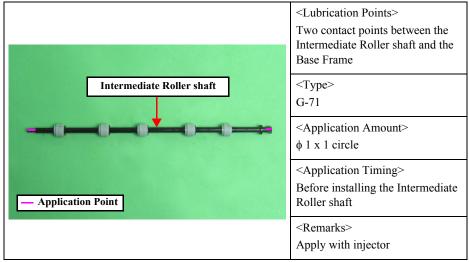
Lubrication of the Intermediate Roller Shaft
